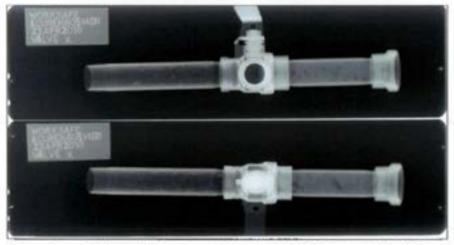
Radiographic images of Valve X in views 90° apart. Ball is fully closed.
